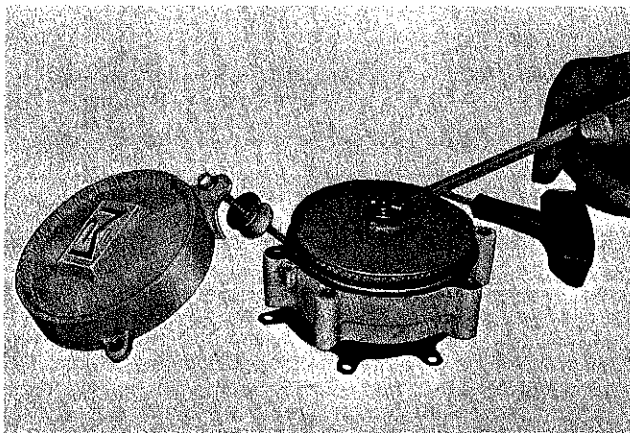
The starter drum is held on the shaft by a small pin. This pin must be removed before the shaft (and ratchet) can be removed. Note the rope pulley bushing and pulley on the starter cover screw. Check wear on this bushing when servicing the starter.
